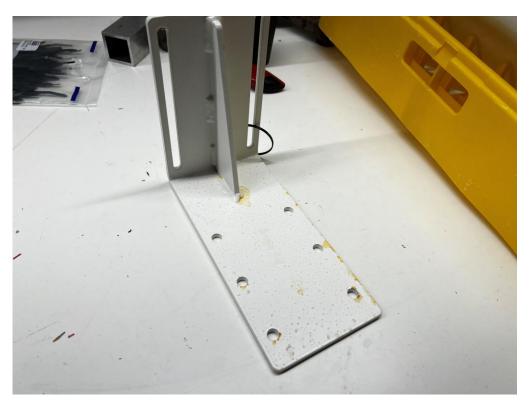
Visual inspection. (Wood/concrete mount P/N: 20032) slight coloration on repaired cracks, and corrosion on edges and crevice from missing welding.
